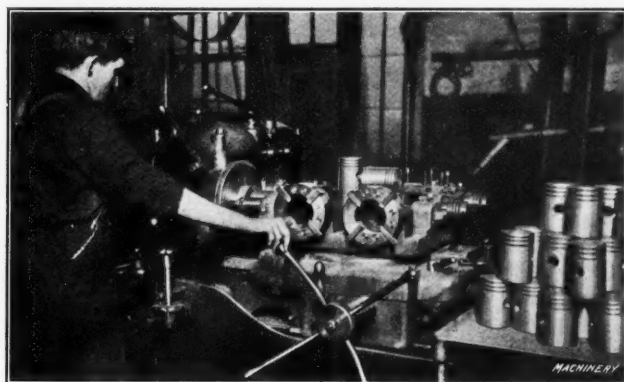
Turning Pistons on a Jones & Lamson Double-spindle Flat Turret Lathe
